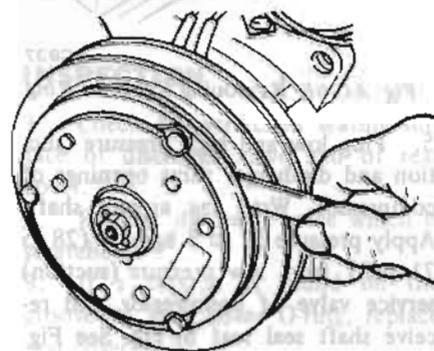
Checking Clutch Hub-to-Pulley Clearance
